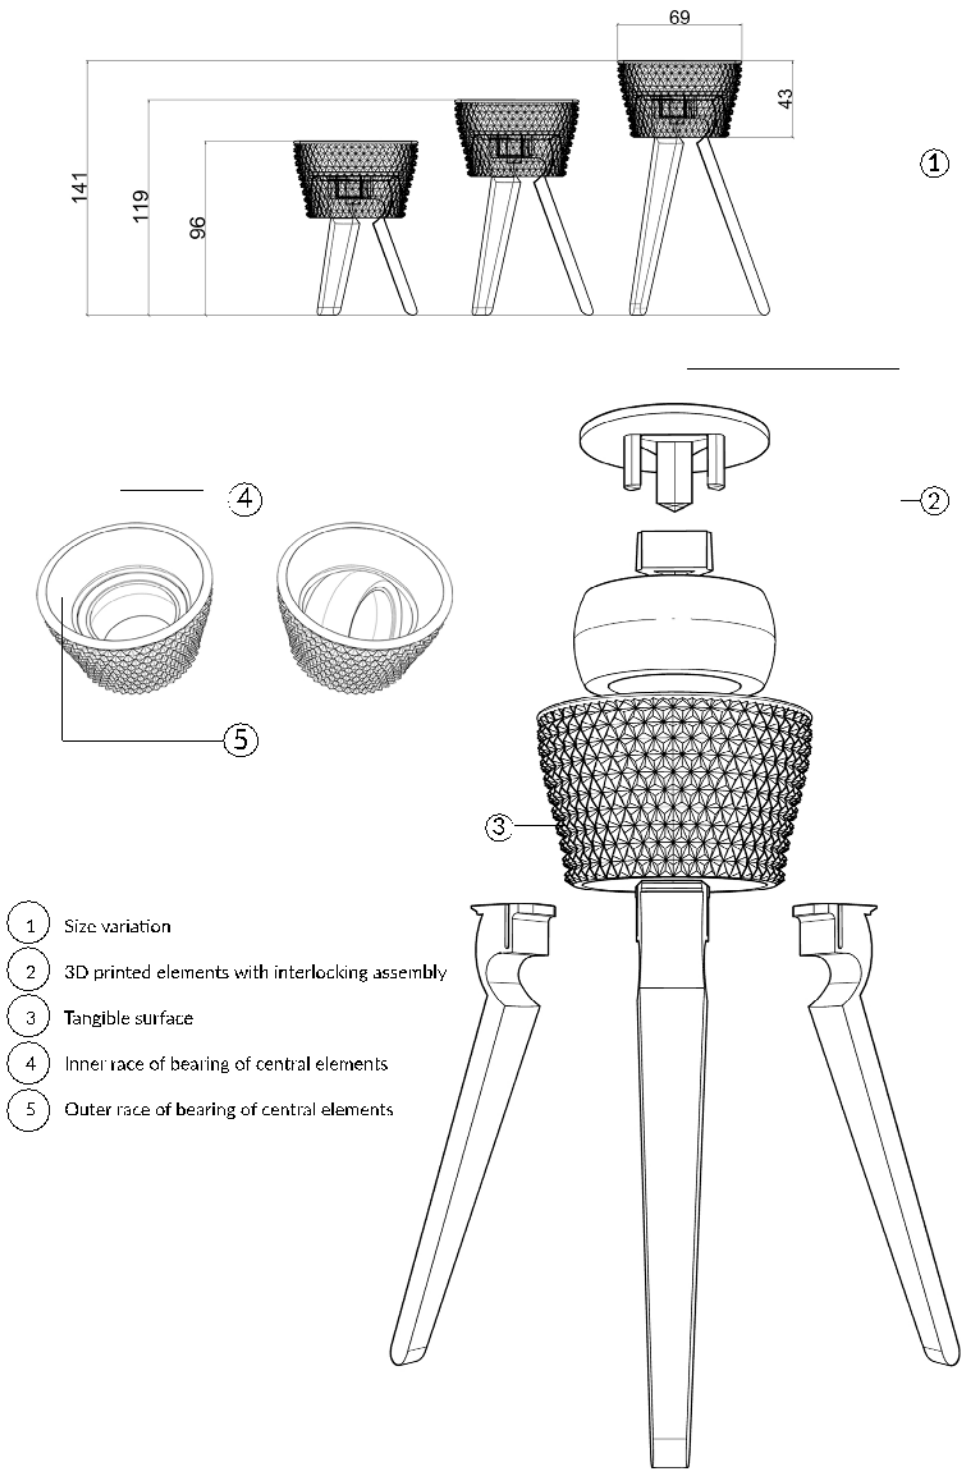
Exploded view and assembly with the centre element with tangible outside surface and bearing feature with the necessary gap to be able to move but printed as one piece.
